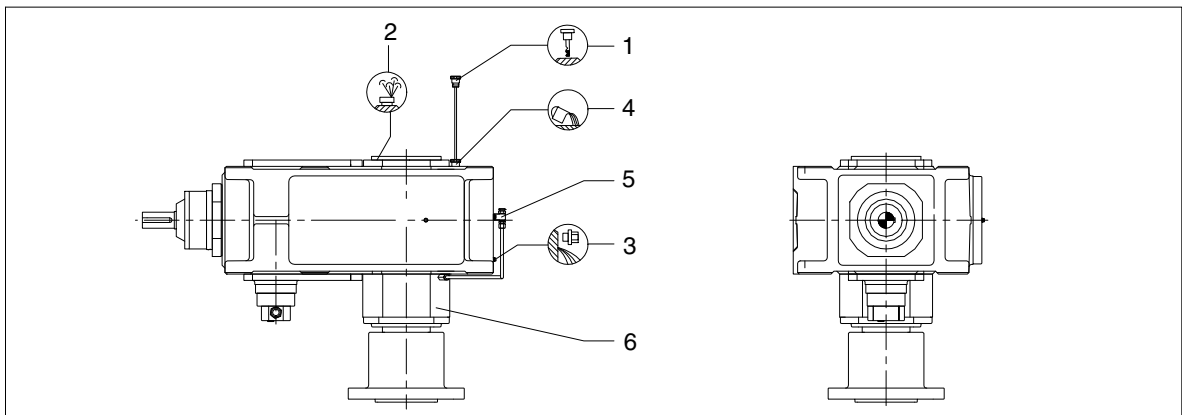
Oil inlet/oil drain gear unit H..V  $\geq 13$
